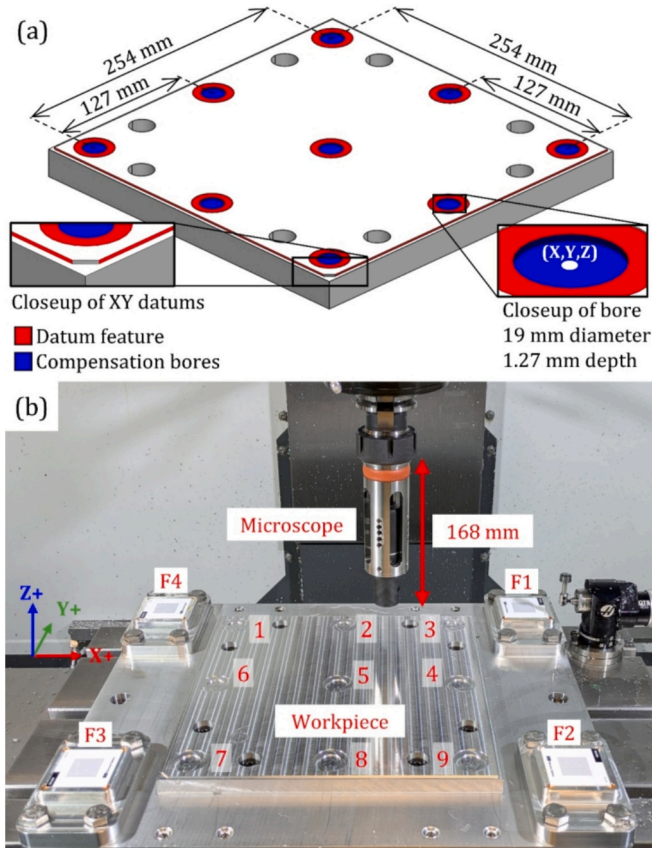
(a) Artifact design for compensation tests. (b) Workpiece set up on machine tool. Numbers indicate order bores were machined in.
